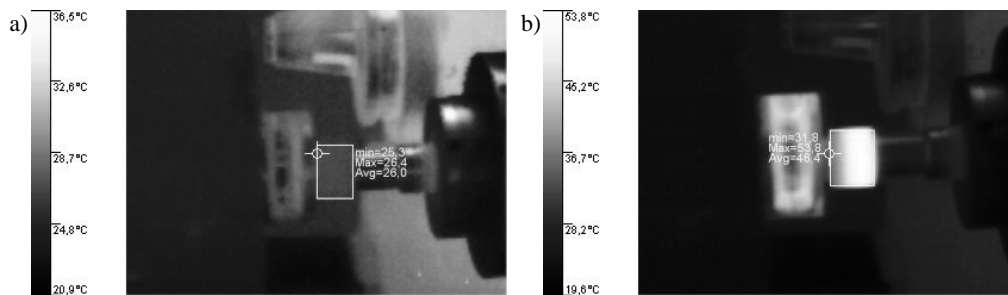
Thermograms of grinding wheel SG F46: a) before grinding; b) after grinding
